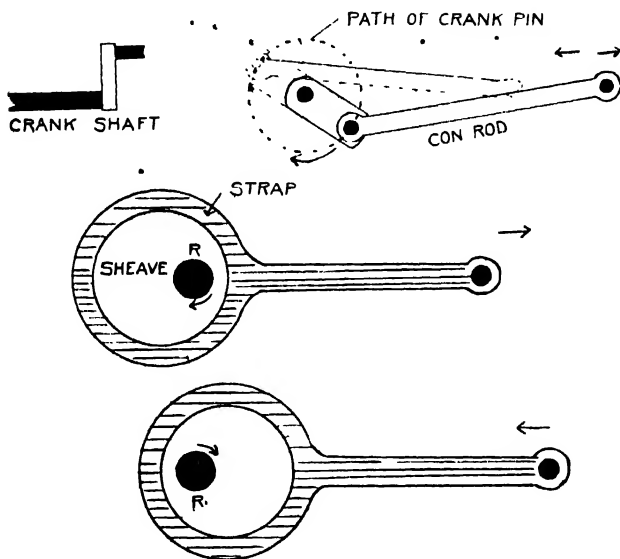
The conversion of rotary to reciprocating motion by means of the crank and the eccentric. R is the section of shaft
